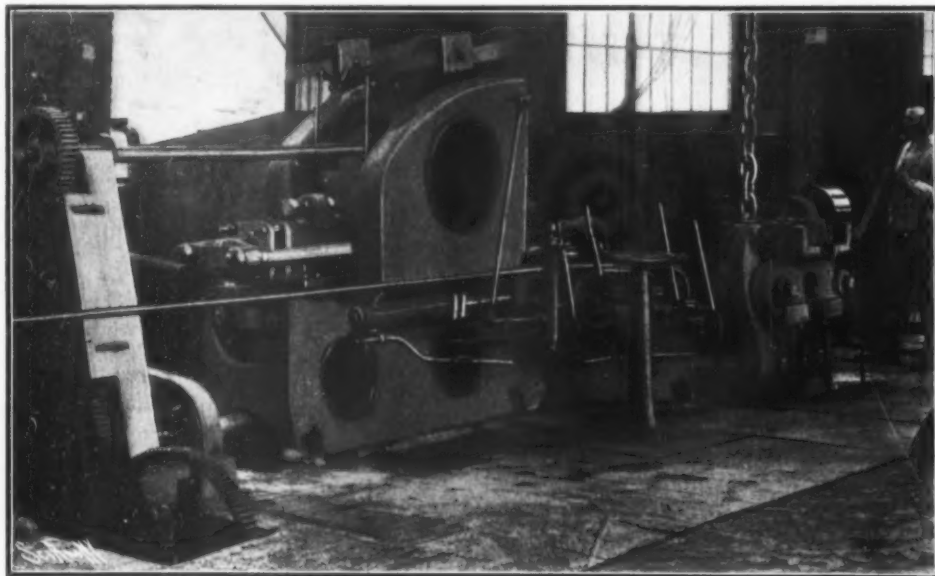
APPARATUS FOR THE MANUFACTURE OF WELDLESS CHAINS.
